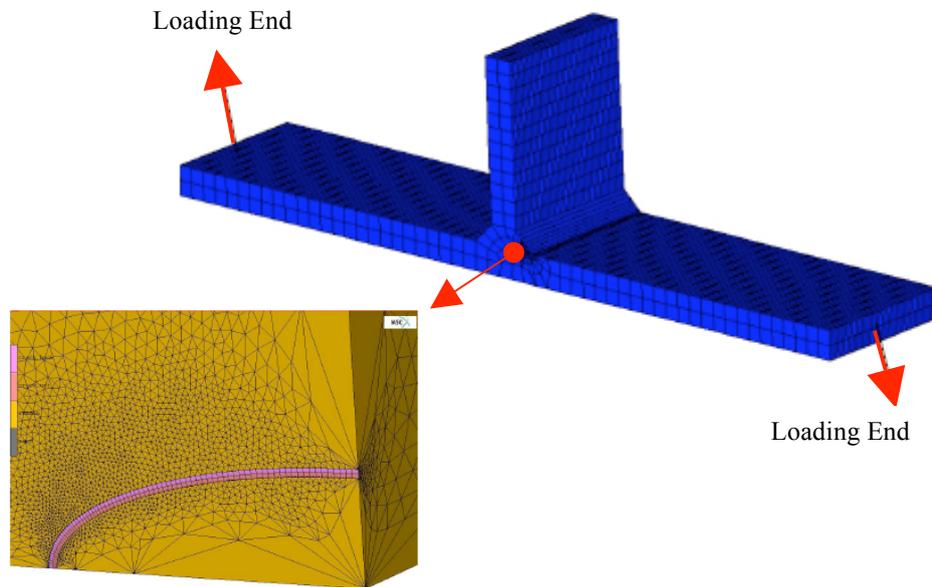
Modelled surface crack on fillet weld. [10]
